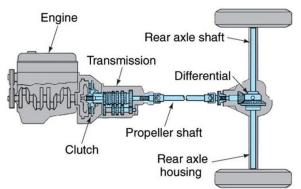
Typical drivetrain/powertrain layout in a rear wheel drive car [1].
